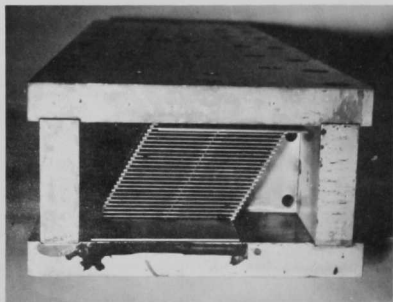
Views of Dummy Fuel-plate Assembly in Brazing Fixture
